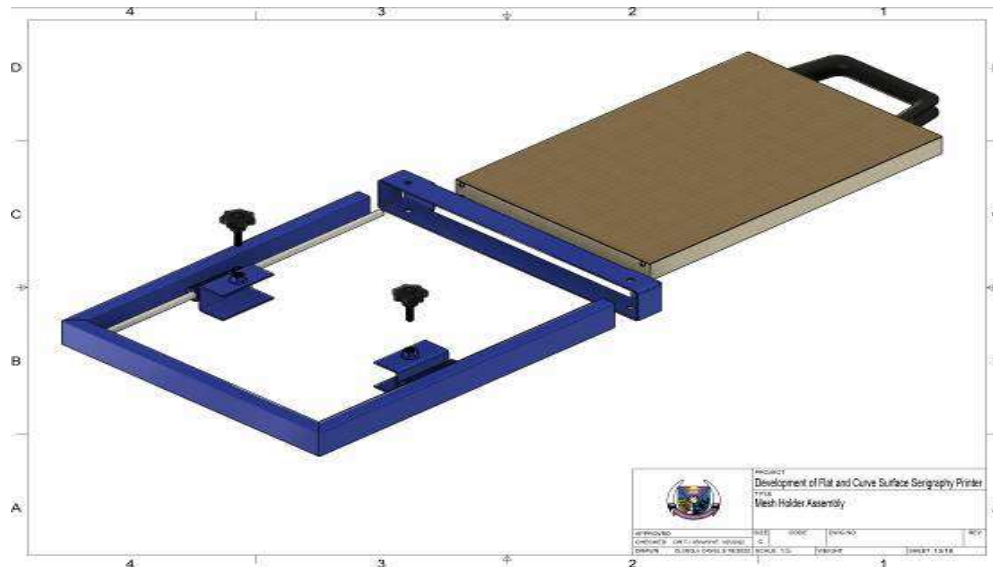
Drawings of the mesh and the holders in frame for the printer
